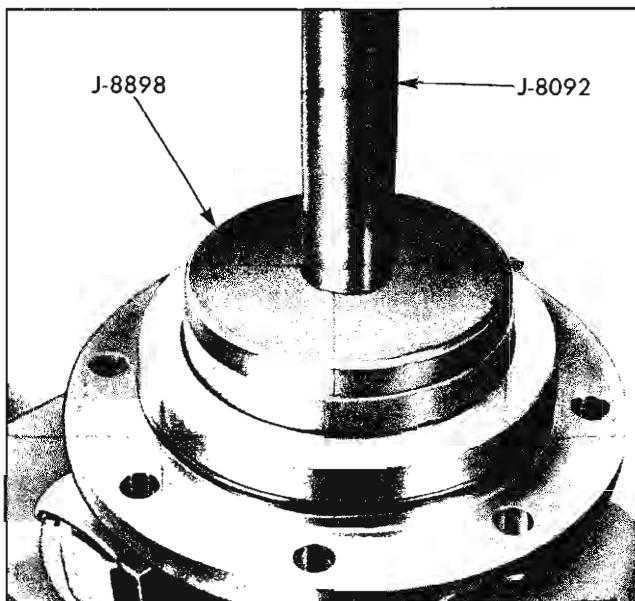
Installing Rear Pinion Bearing Outer Race
